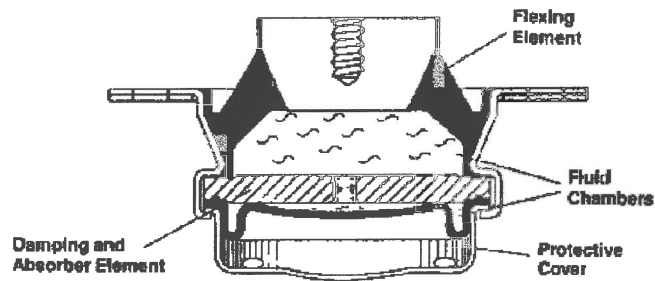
Sectional view of the fluidlastic[®] mount (Lord Corporation)
